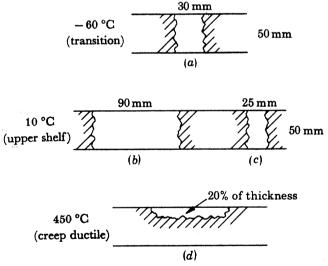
Stable flaw sizes from code requirements. The material is C-Mn steel with heat-treated welds. (a), (b) and (d) are based on membrane loading and (c) is adjacent to a structural discontinuity.
